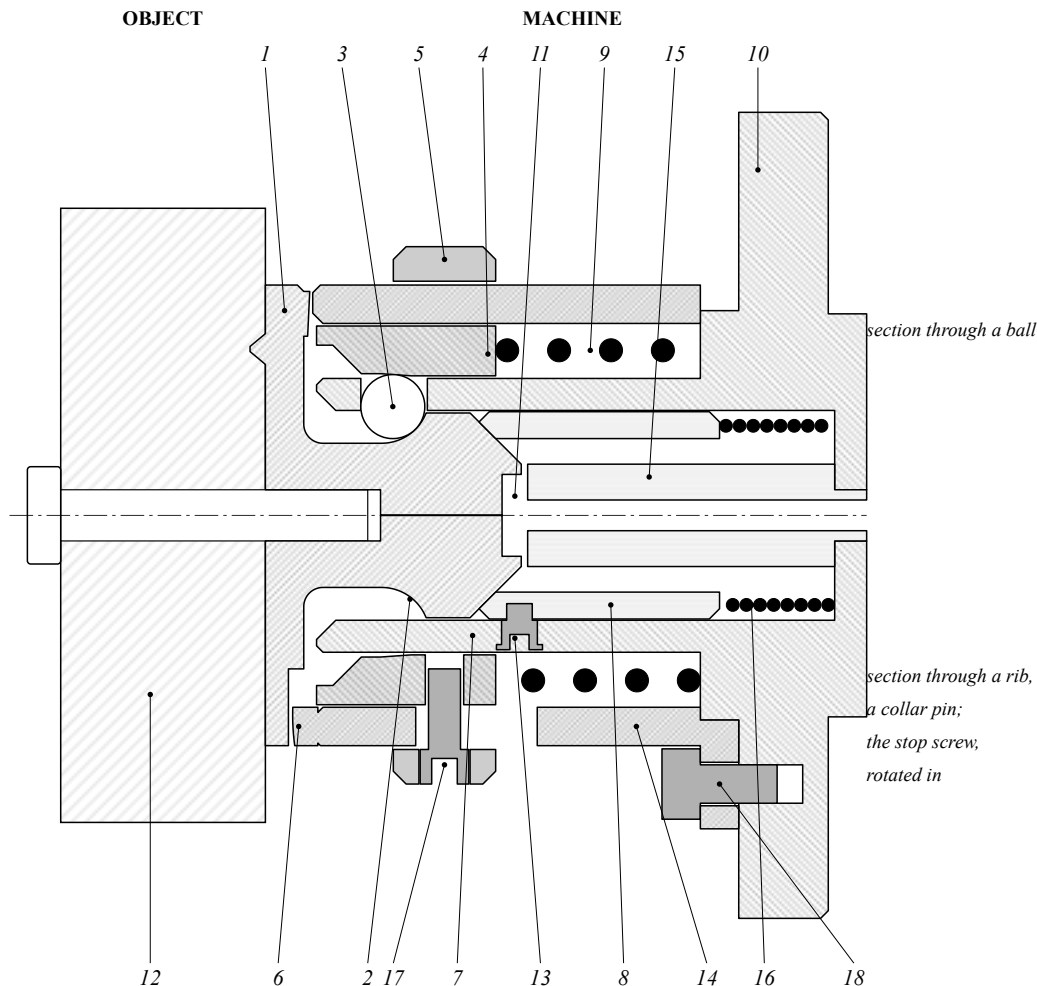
UGP-M mated and locked, CAD section with schematic springs and fixing screw. 1 stud; 2 toroidal seat; 3 ball (six, 5 mm (0.197 in)); 4 locking sleeve; 5 release collar; 6 rib of the nose seated in a V-groove; 7 body and cage; 8 arming plunger; 9 sleeve spring; 10 flange ISO 9409-1-50-4-M6; 11 tag recess; 12 panel of the object and fixing screw; 13 stop screw of the plunger, which lies at 30° and is rotated into the plane of the section; 14 nose; 15 antenna post; 16 plunger spring; 17 special dog-point screw, M4 thread, through collar, nose slot and sleeve; 18 M3 nose screw into the flange face.
